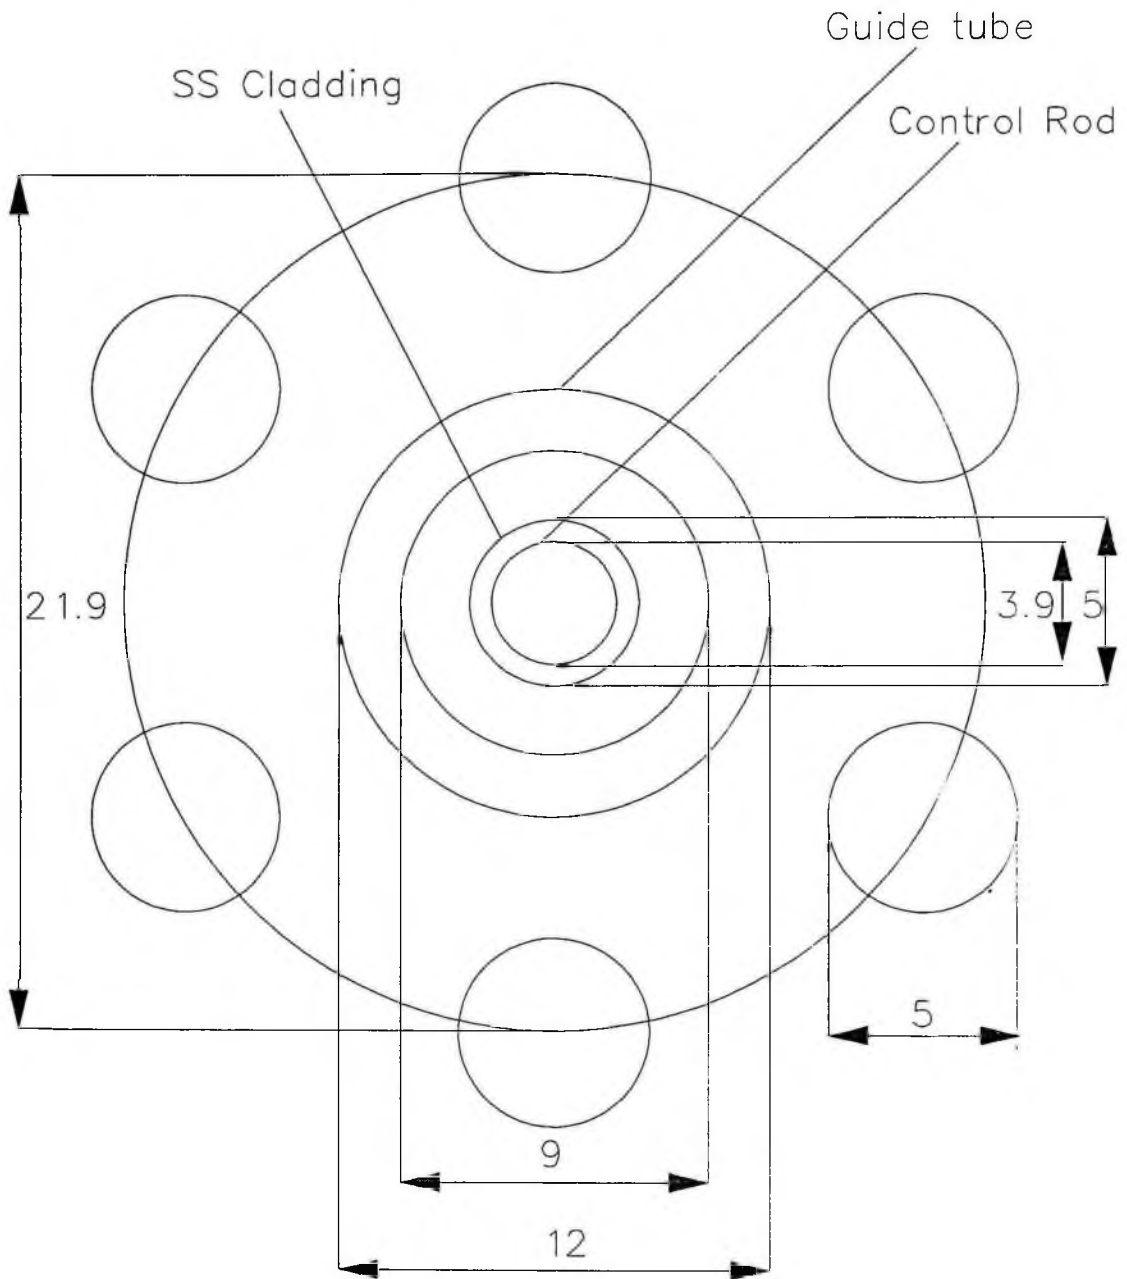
Layout of Control Rod with 6 neighbouring fuel rods
